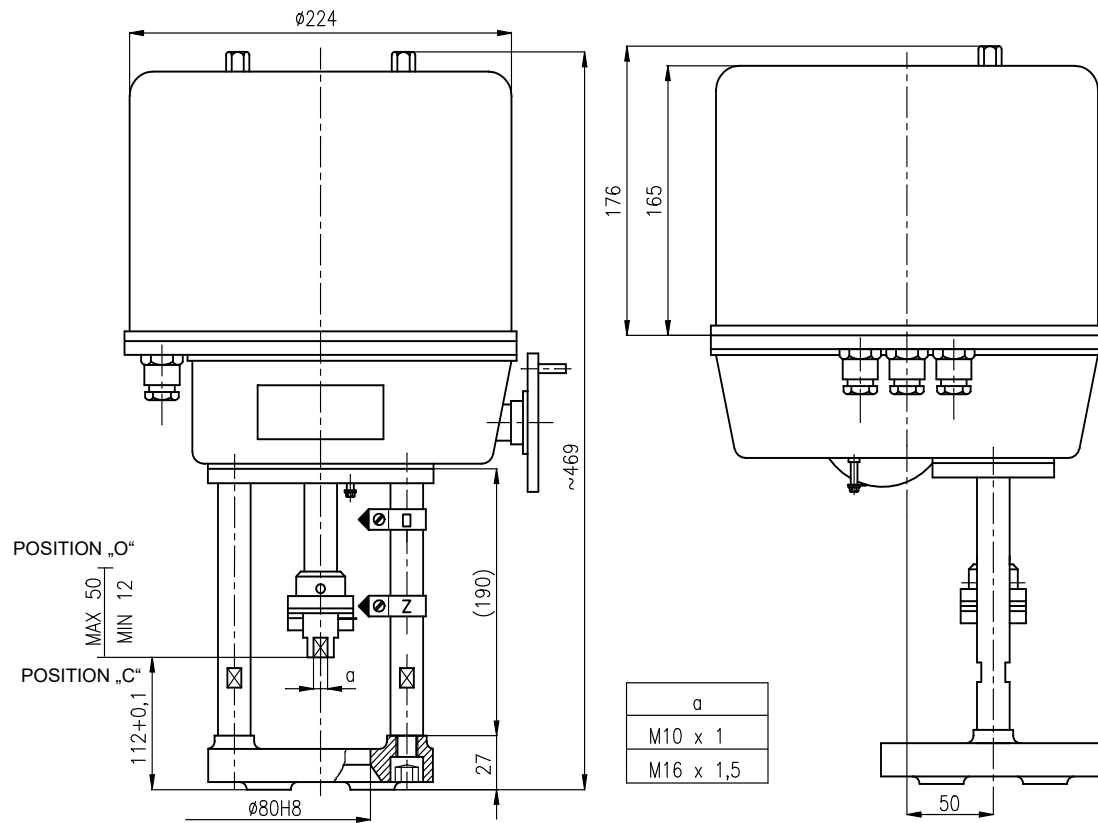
DIMENSIONAL DRAWING - CONNECTION P5
